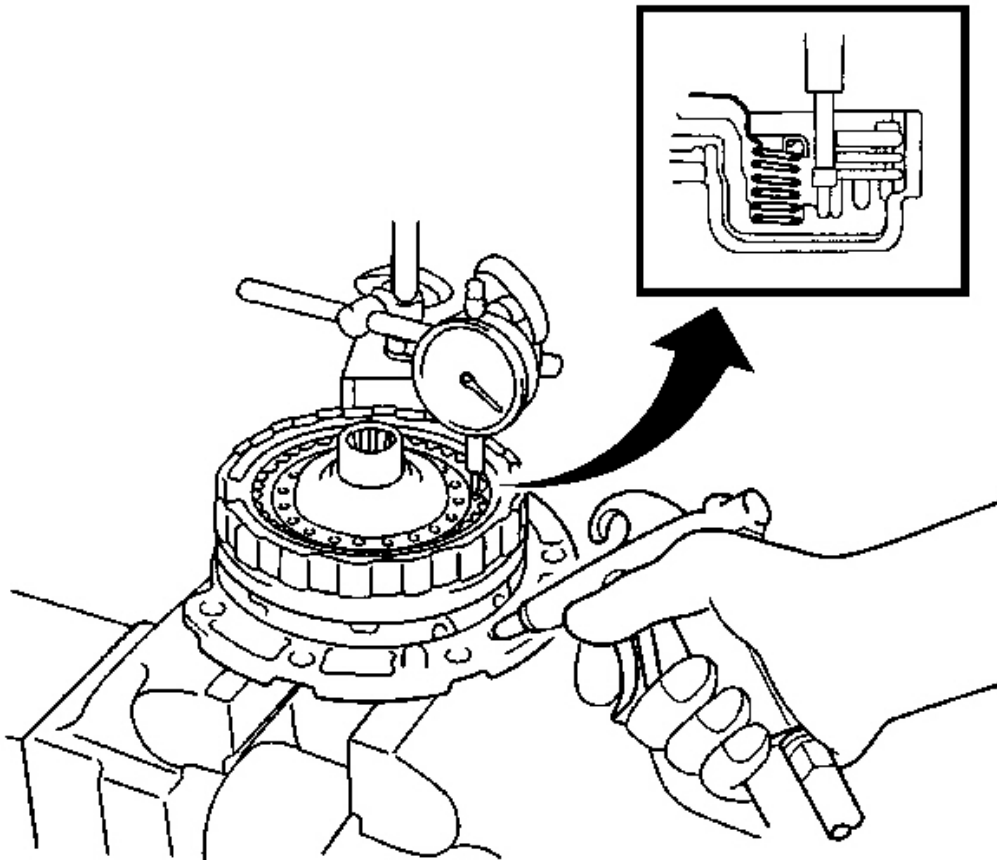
Using A Dial Indicator Measure The Direct Clutch Piston Stroke While Applying Compressed Air
